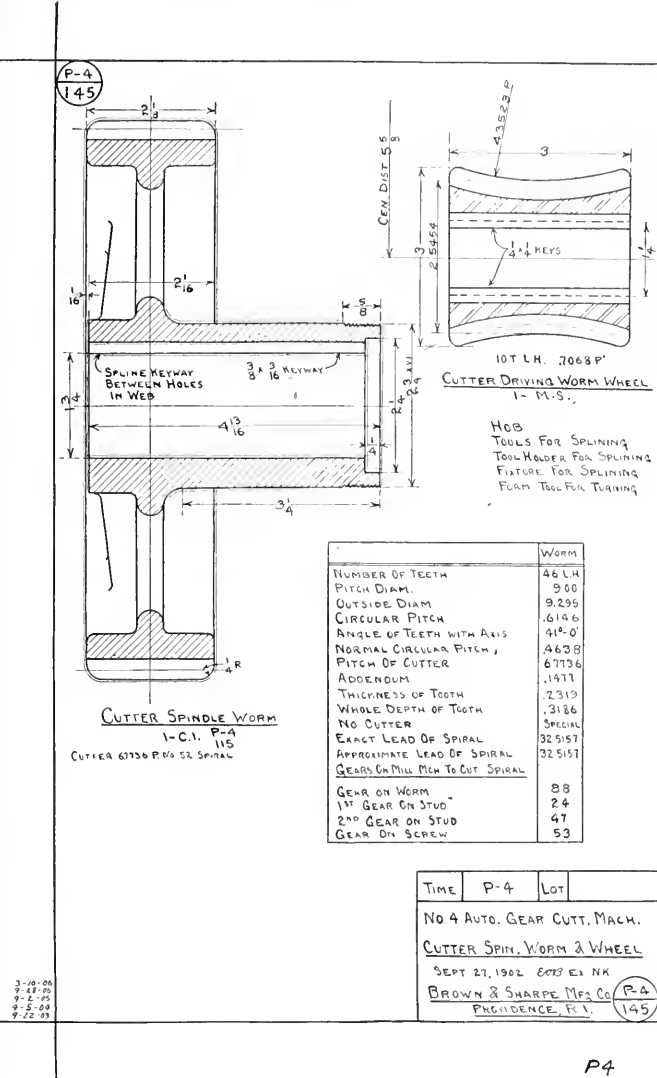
The Worm Drive of the Brown & Sharpe Gear Cutter.
